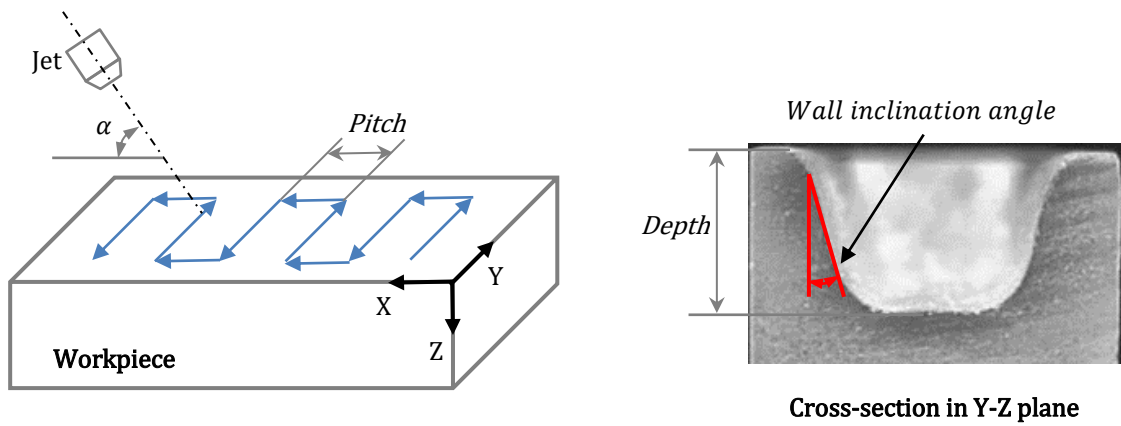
Milling experimental setup and cross-section of pocket milled [112].
